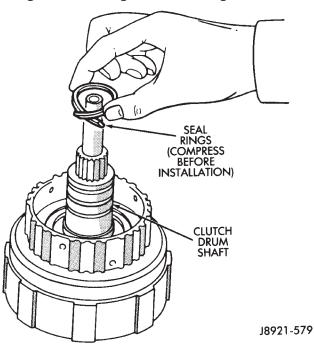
Installing Clutch Drum Shaft Seal Rings
